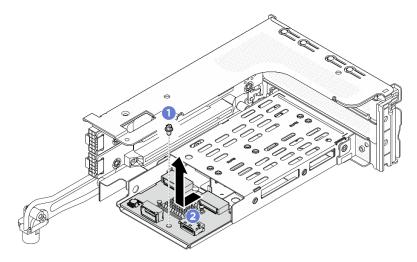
Removing the M.2 backplane from 3FH M.2 riser cage
